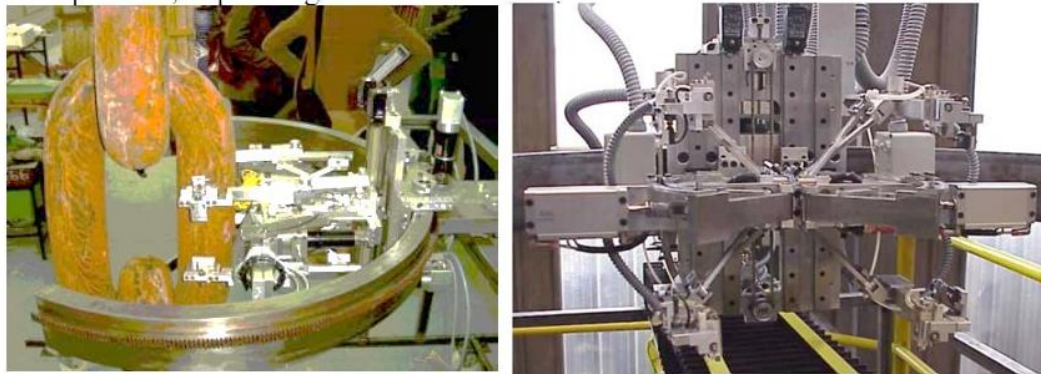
Ultrasound welding inspection automated system [116]
